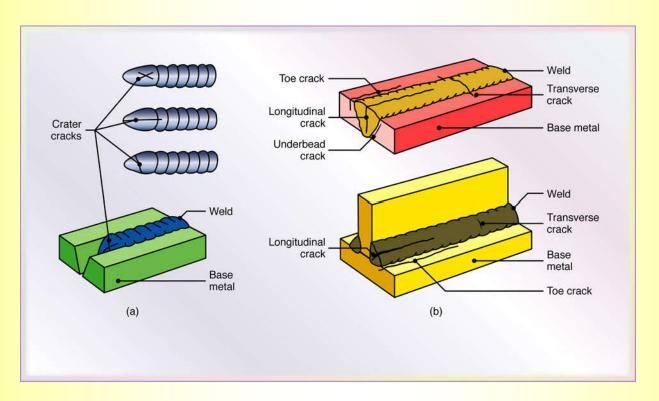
Types of cracks developed in welded joints. The cracks are caused by thermal stresses, similar to the development of hot tears in castings (see also Fig. 10.12).
